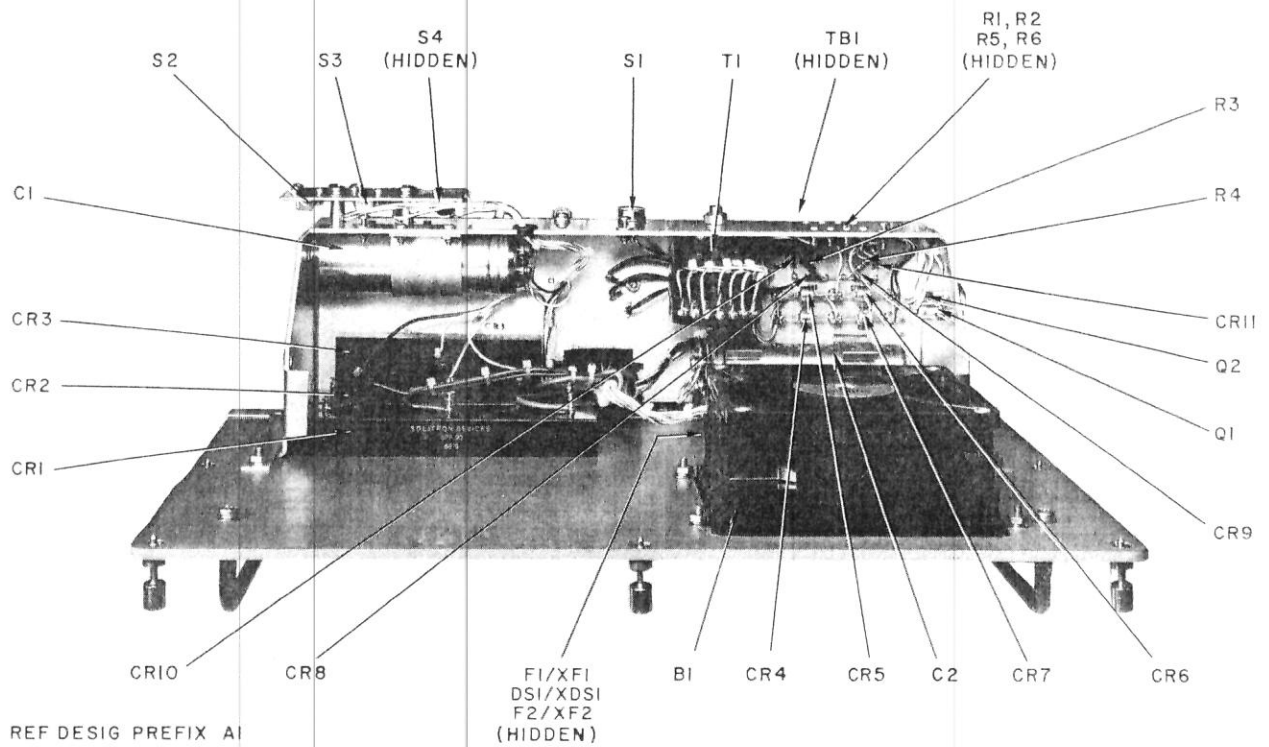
Front Panel Assembly A1, Component Locations (Units with SN-0340 or Under)
